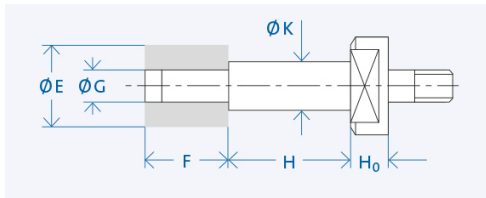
WITH ADJUSTMENT SCREW (PS)
